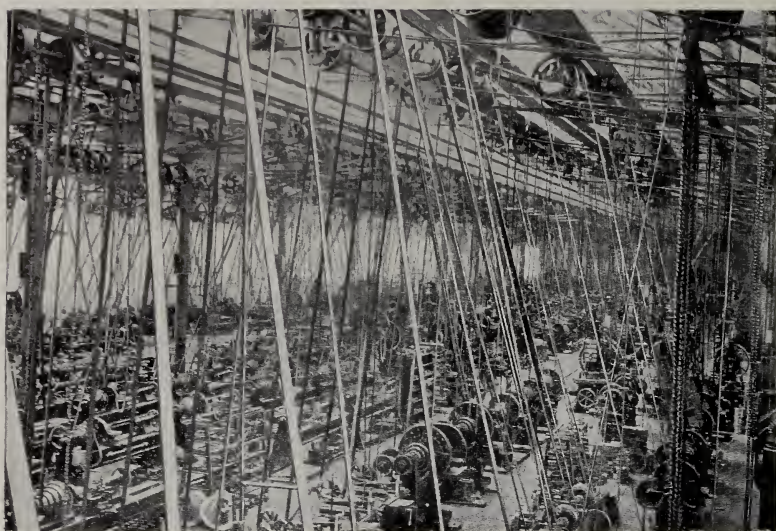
A LARGE SHOP DRIVEN BY SHAFTS AND BELTS
